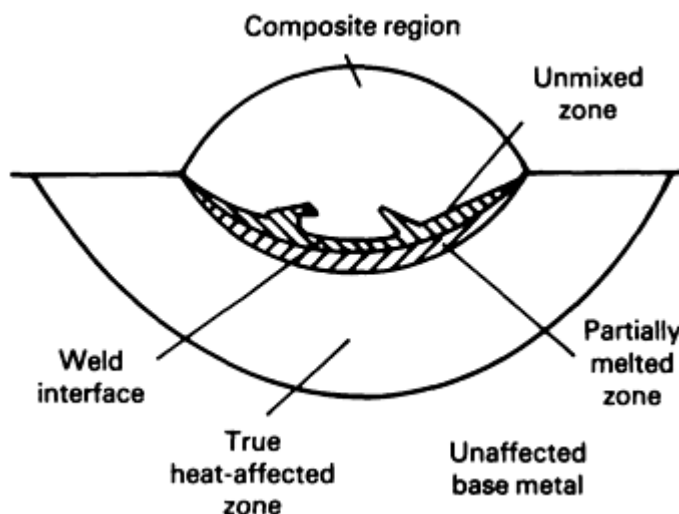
SCHEMATIC SHOWING LOCATION OF UNMIXED ZONE IN A SOLIDIFIED WELDMENT. SOURCE: REF 6
